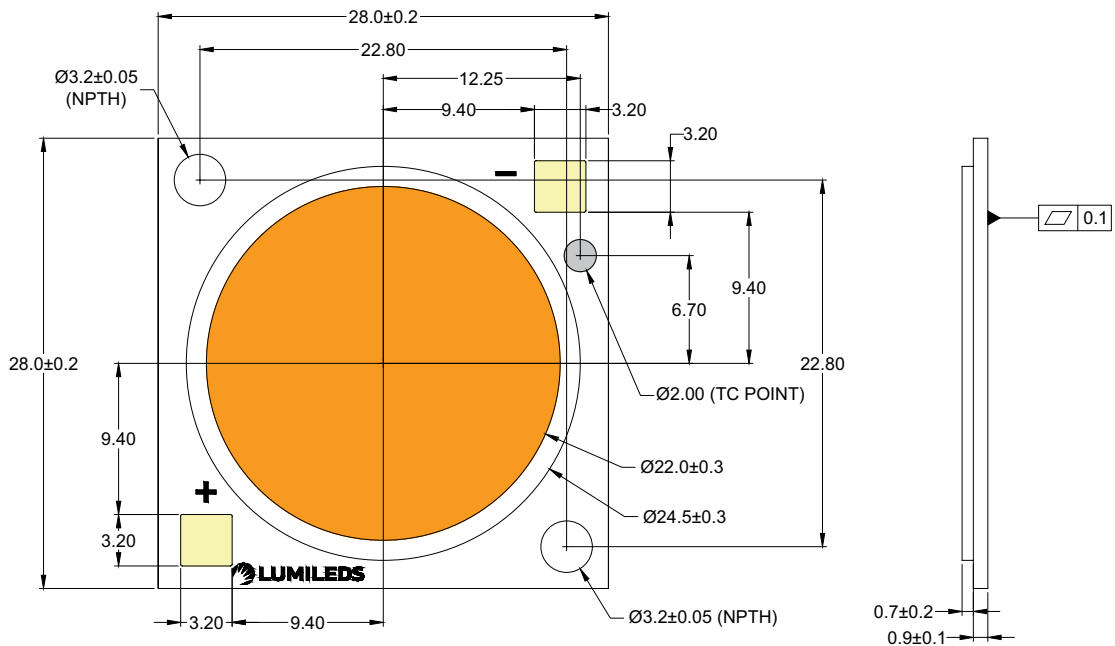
Mechanical dimensions for L2C6-xxxxxL11x2200, L2C6-xxxxxL13x2200, L2C6-xxxxxL16x2200, L2C6-xxxxxR12x2200 and L2C6-xxxxxR18x2200.
